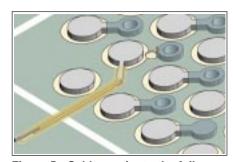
Solder a wire to the foil jumper bond with epoxy.
